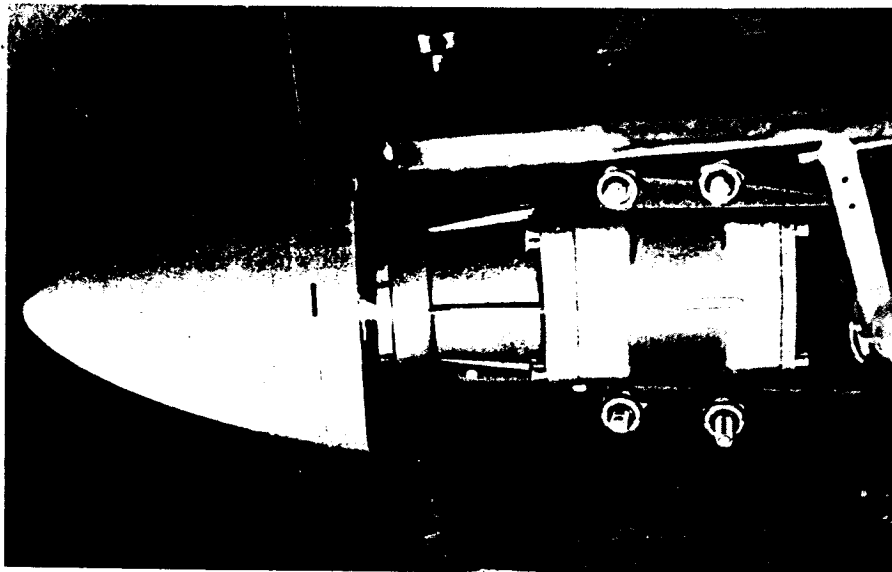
If you do not tap the engine mount, you will need to retain the mounting bolts with nylon-insert lock nuts.
